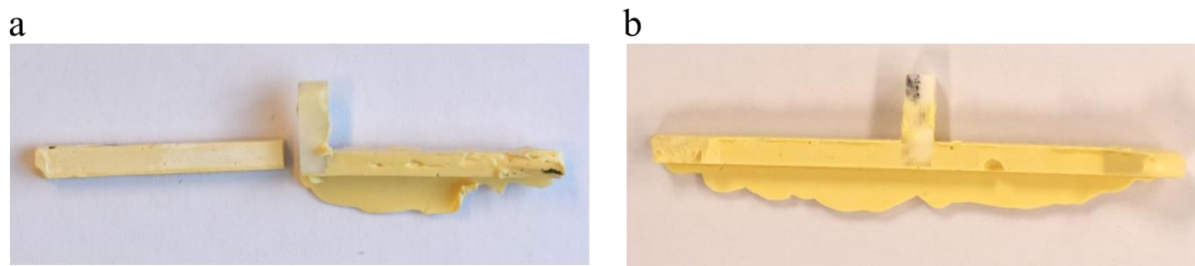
ZPC specimens. a: specimen broke adhesively upon retrieval from the mould. b: specimen was successively retrieved from the mould but broke cohesively/adhesively upon removal of the excess flash.
